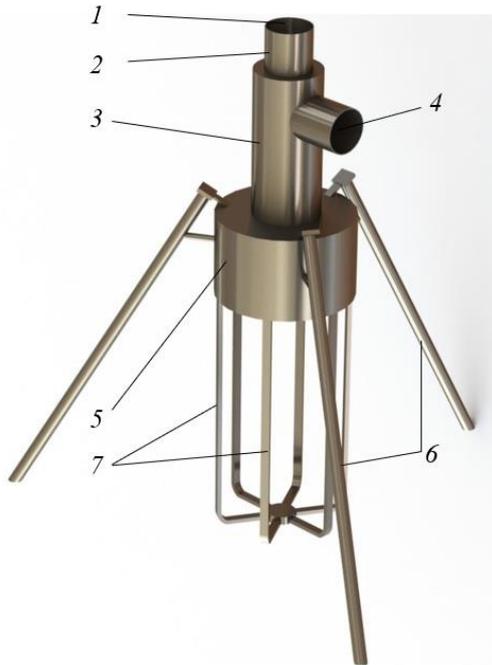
The digital twin of the classifier with coaxial pipes: 1 – inlet; 2 – internal pipe; 3 – external pipe; 4 – outlet; 5 – cylindrical part; 6 – legs; 7 – metal construction for removable container.
